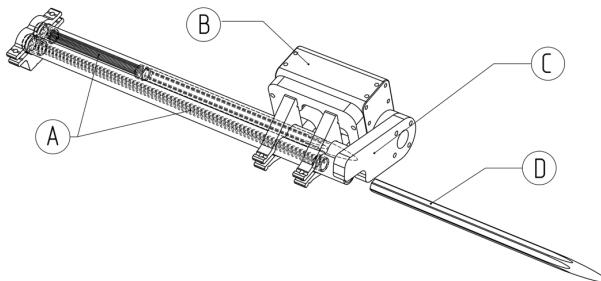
The drawing of the torpedo tube (A – Springs, B - Servo motor, C - Shutter, D – Torpedo)
